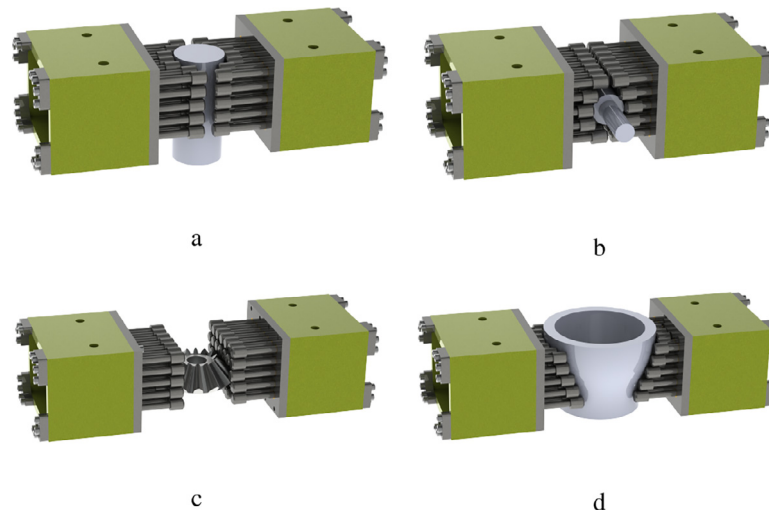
Demonstration of shape variability by the example of some demonstrators: (a) workpiece bevel gear, (b) shaft, (c) bevel gear, (d) bearing bush.
